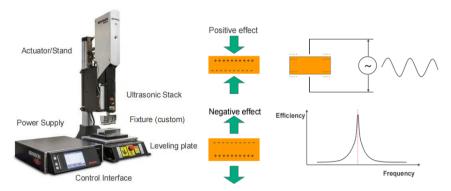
Ultrasonic welding machine and welding schematic diagram.
